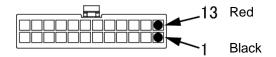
Mount the connector of valve for automatic water fill
